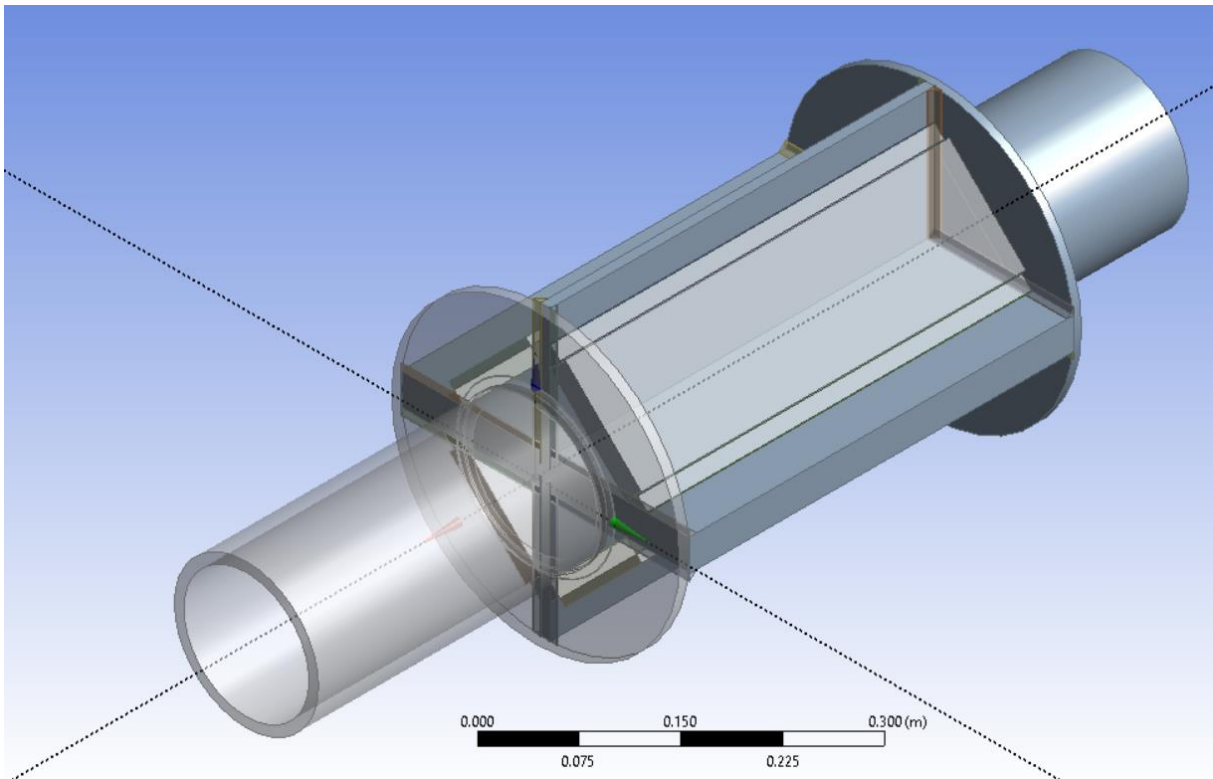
Weld between the pillar and deck Design Modeler sketch
